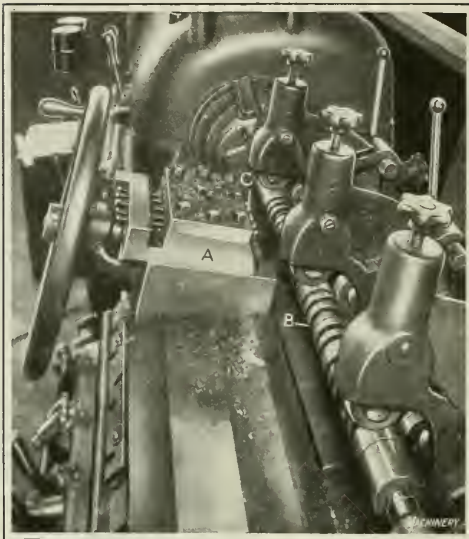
Spacing the Cams and Line Bearings on a Lo-swing Lathe
